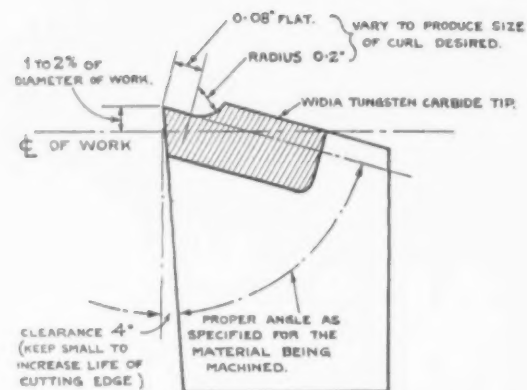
In grinding the chip breaker on the top of the tools it is most important not to weaken the cutting edge. A satisfactory method is shown above.
